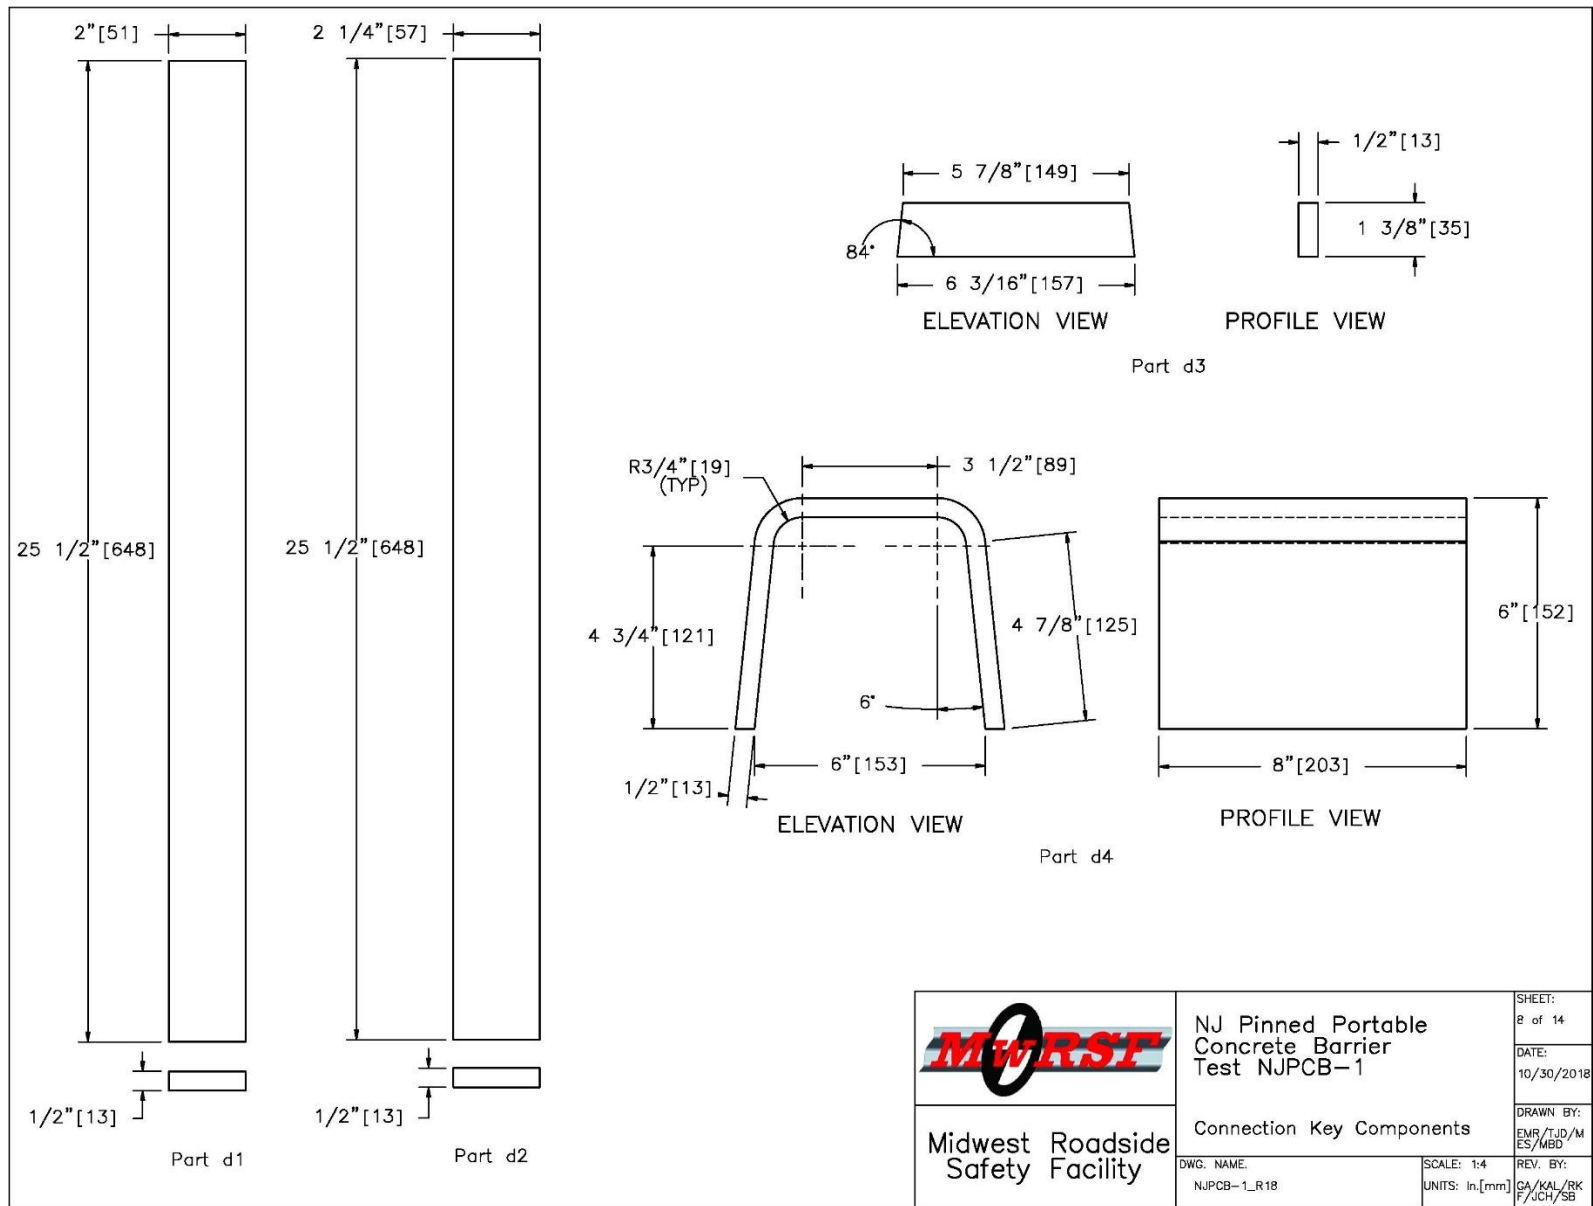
PCB Connection Key Component Details, Test No. NJPCB-1
